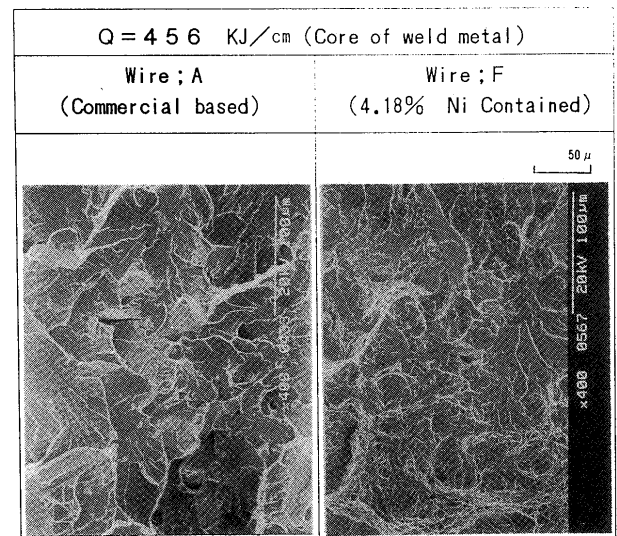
Examples of impact fractures of the weld metal produced by the wire containing Ni.
